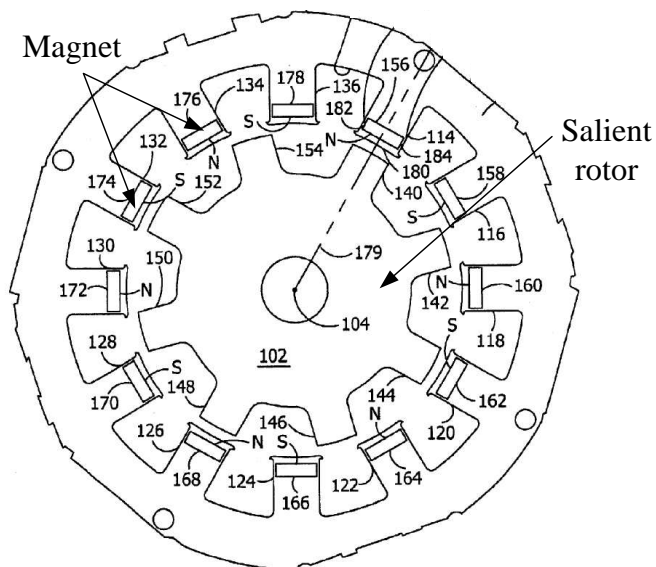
Structure of doubly salient machine PM machine having PM in stator teeth [53]
